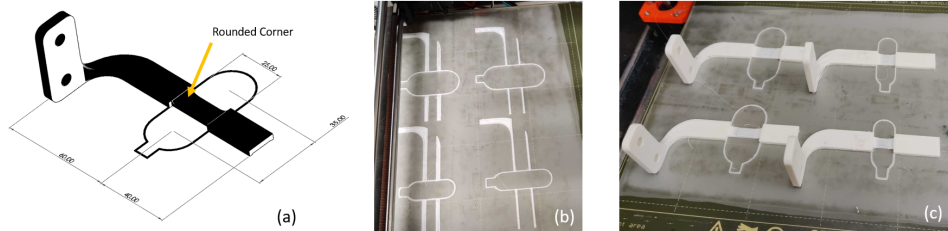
(a):Important dimensions of a pouch motor test sample. Each test sample has different length and width sizes while other dimensions stay unchanged. In this figure, the width $h = 25mm$ and the length $l = 35mm$; (b):Pouch motors sealed by 3d printer nozzles in the first layer and paused so that the support PC layers could be attached into the structures; (c):Complete pouch motor test samples made by the monolithic filament welding fabrication. Pouch sizes($h \times l$) are 15×25 , 15×35 , 25×25 , 25×35 , respectively in millimeters.
